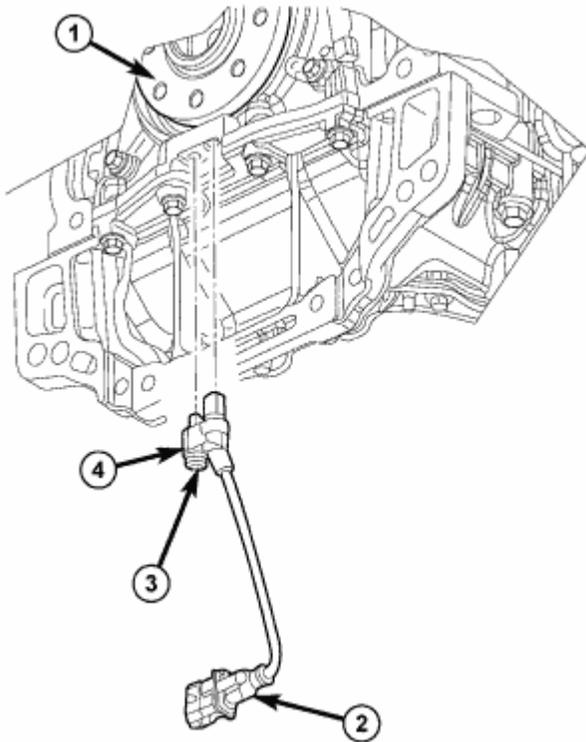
Identifying Crankshaft Hub, CKP Electrical Connector, CKP Mounting Bolt & CKP Sensor
